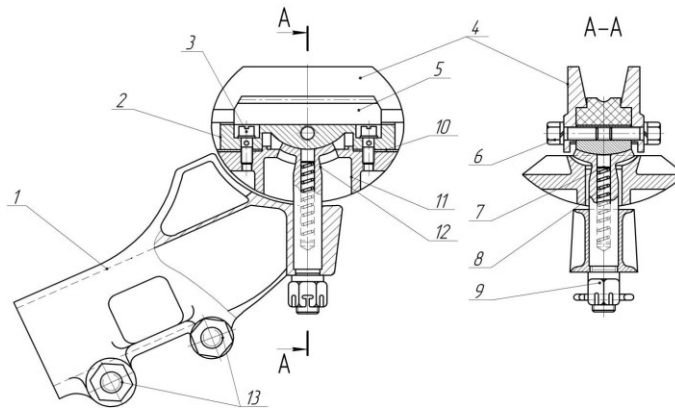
Contact head of the current collector: 1, 11 – holders; 2 – insert; 3, 6, 13 – bolts; 4 – cheek; 5 – carbon insert; 7 – brush; 8 – spring; 9 – nut; 10 – gasket; 12 – the fifth.
